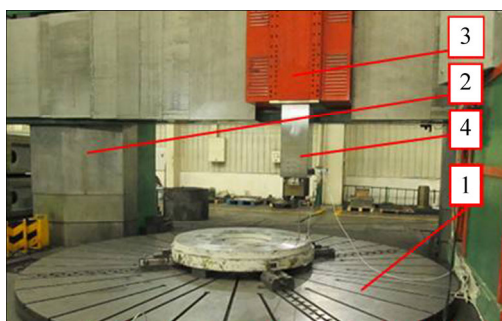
CNC heavy gantry milling machine tool: 1–Countertop (*c*-axis); 2–Lathe bed; 3–Apron (*y*-axis); 4–Ram (*z*-axis)
